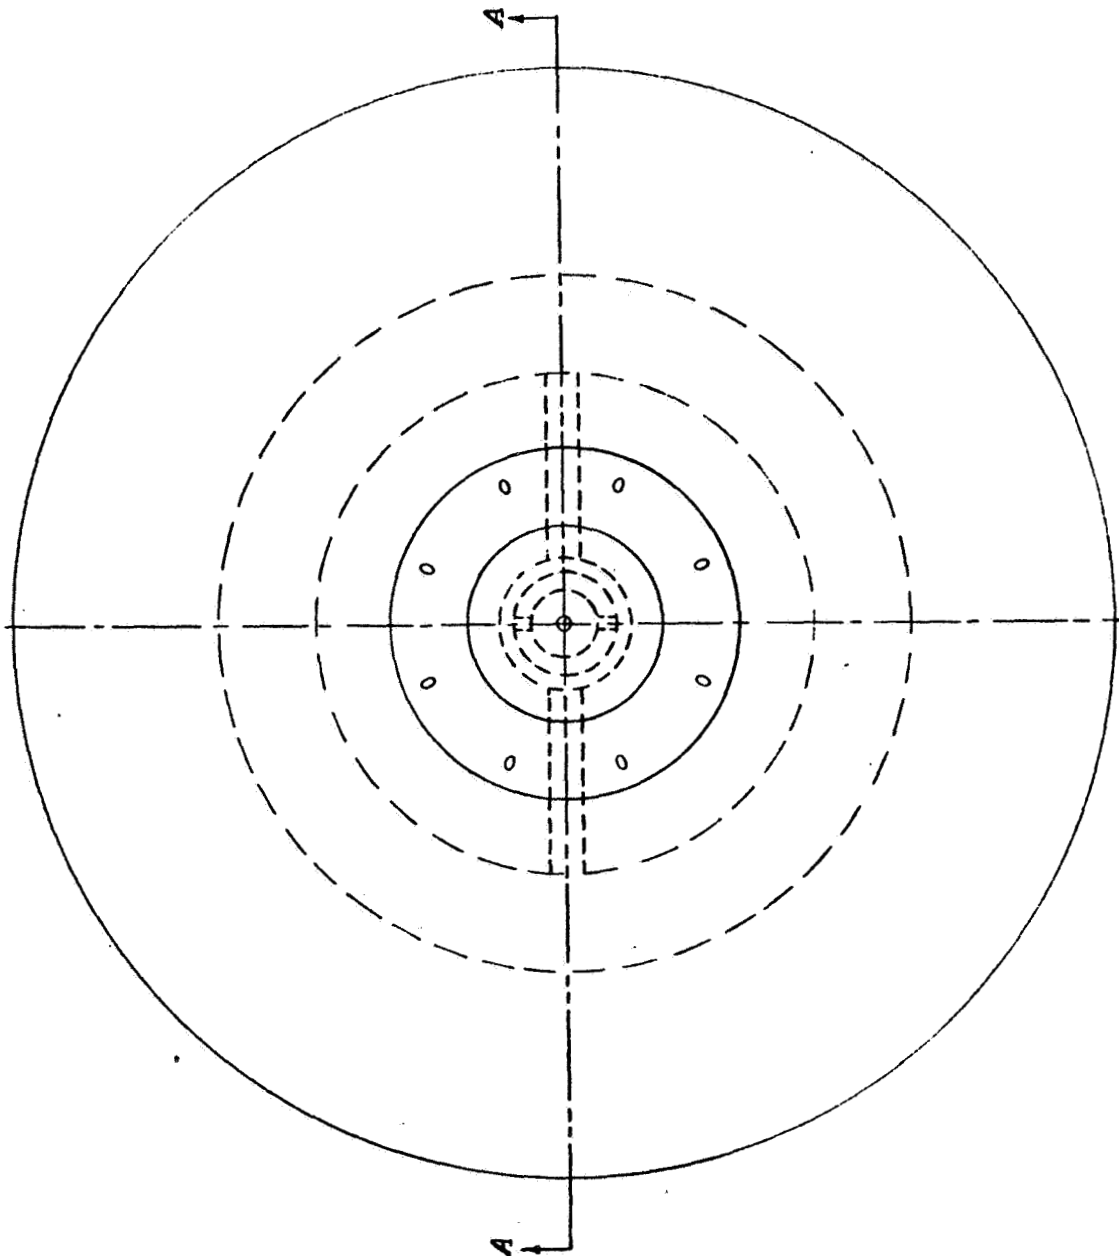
WORKING DRAWING FOR 100-POUND THRUST INJECTOR WITH ANGLAR RES. OF IMPINGING JETS IN PRE-COMBUSTION CUP, DESIGN I
